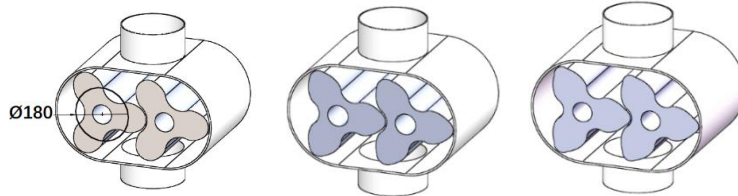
Assembly diagram of negative displacement involute rotor (a)Base circle 90 involute rotor(b)Base circle 80 involute rotor(c)Base circle 70 involute rotor
